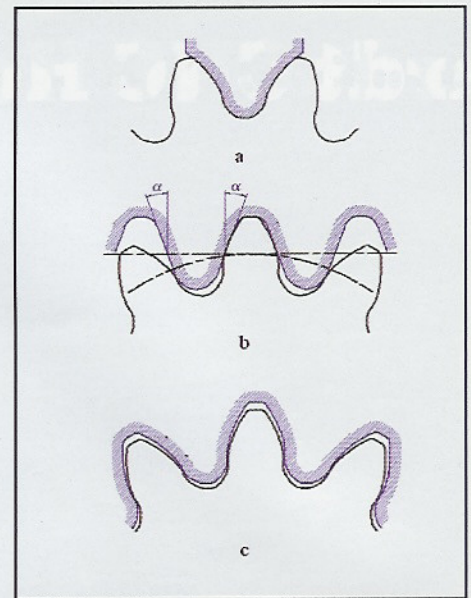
TOOLING PROFILES; A—PROFILE GEAR MACHINING, B—GENERATING GEAR MACHINING, C—GEAR MOLDING, POWDER METAL PROCESSING, OR CASTING.
